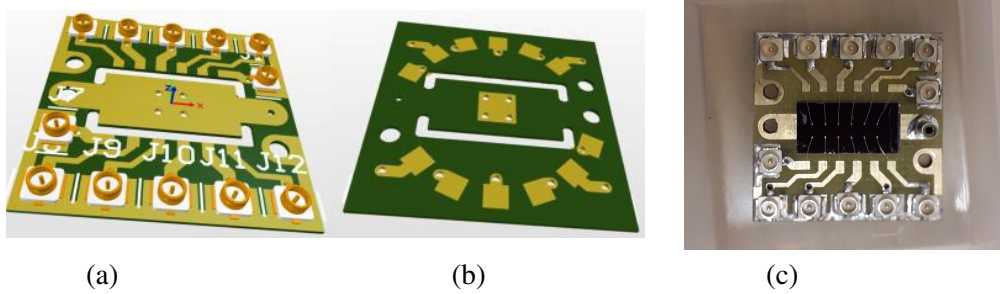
PCB design of the top side (a), back side (b) and PCB with devices bonded on it (c). A pin for connection of bias is at the right center of the picture (c).
